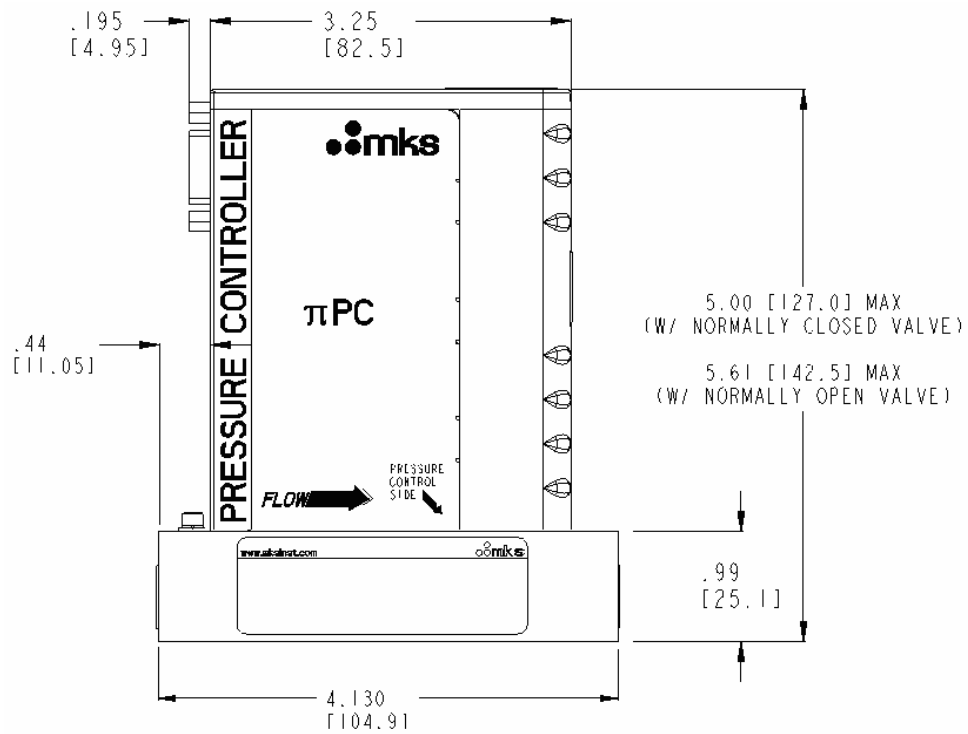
C or W Seal Front View – 9-Pin D RS-485
